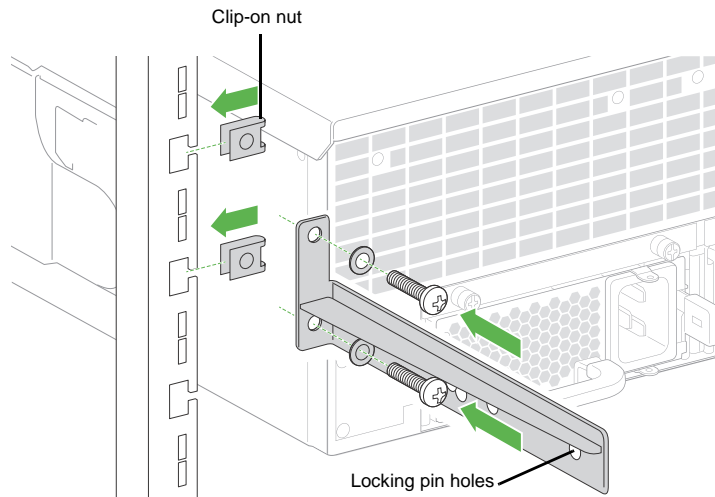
Attaching the Left Rack-Attachment Bracket
